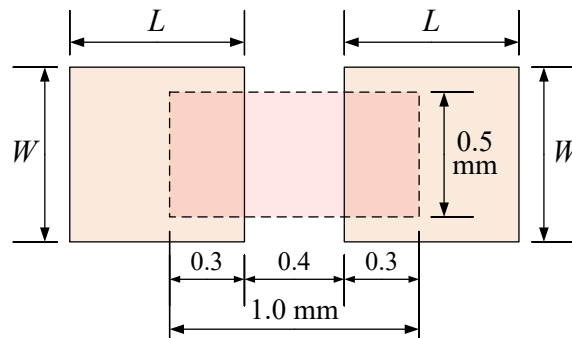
Resistor 0402 imperial SMT package and solder pad dimensions.
